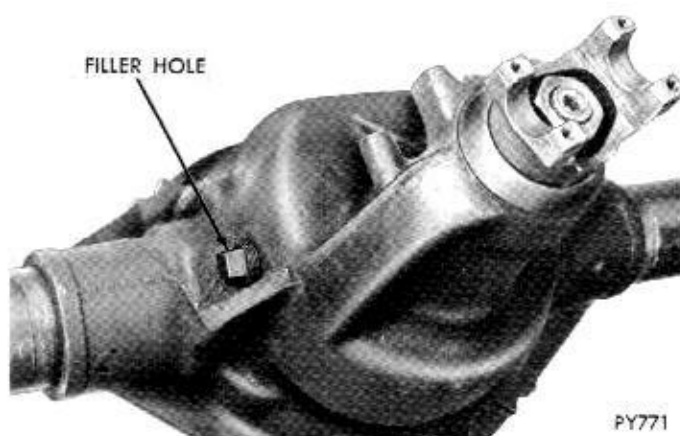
Filler Plug Location (8-1/4 In. Axle)
